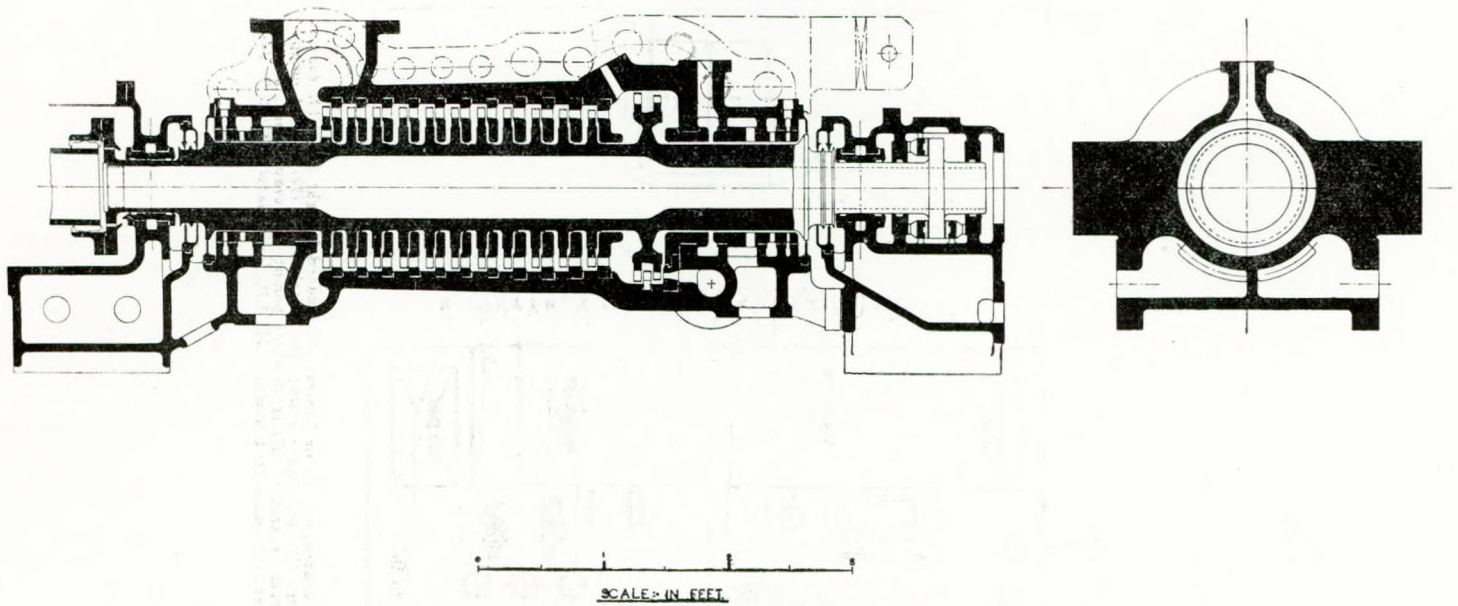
Sectional elevations of H.P. turbine, Scheme 3.
